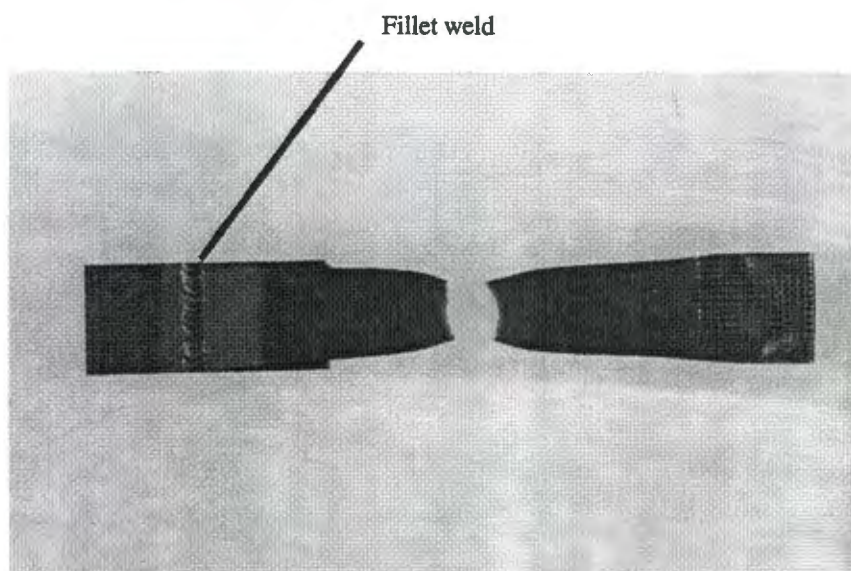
A typical fillet weld failure; reduced 50%.
